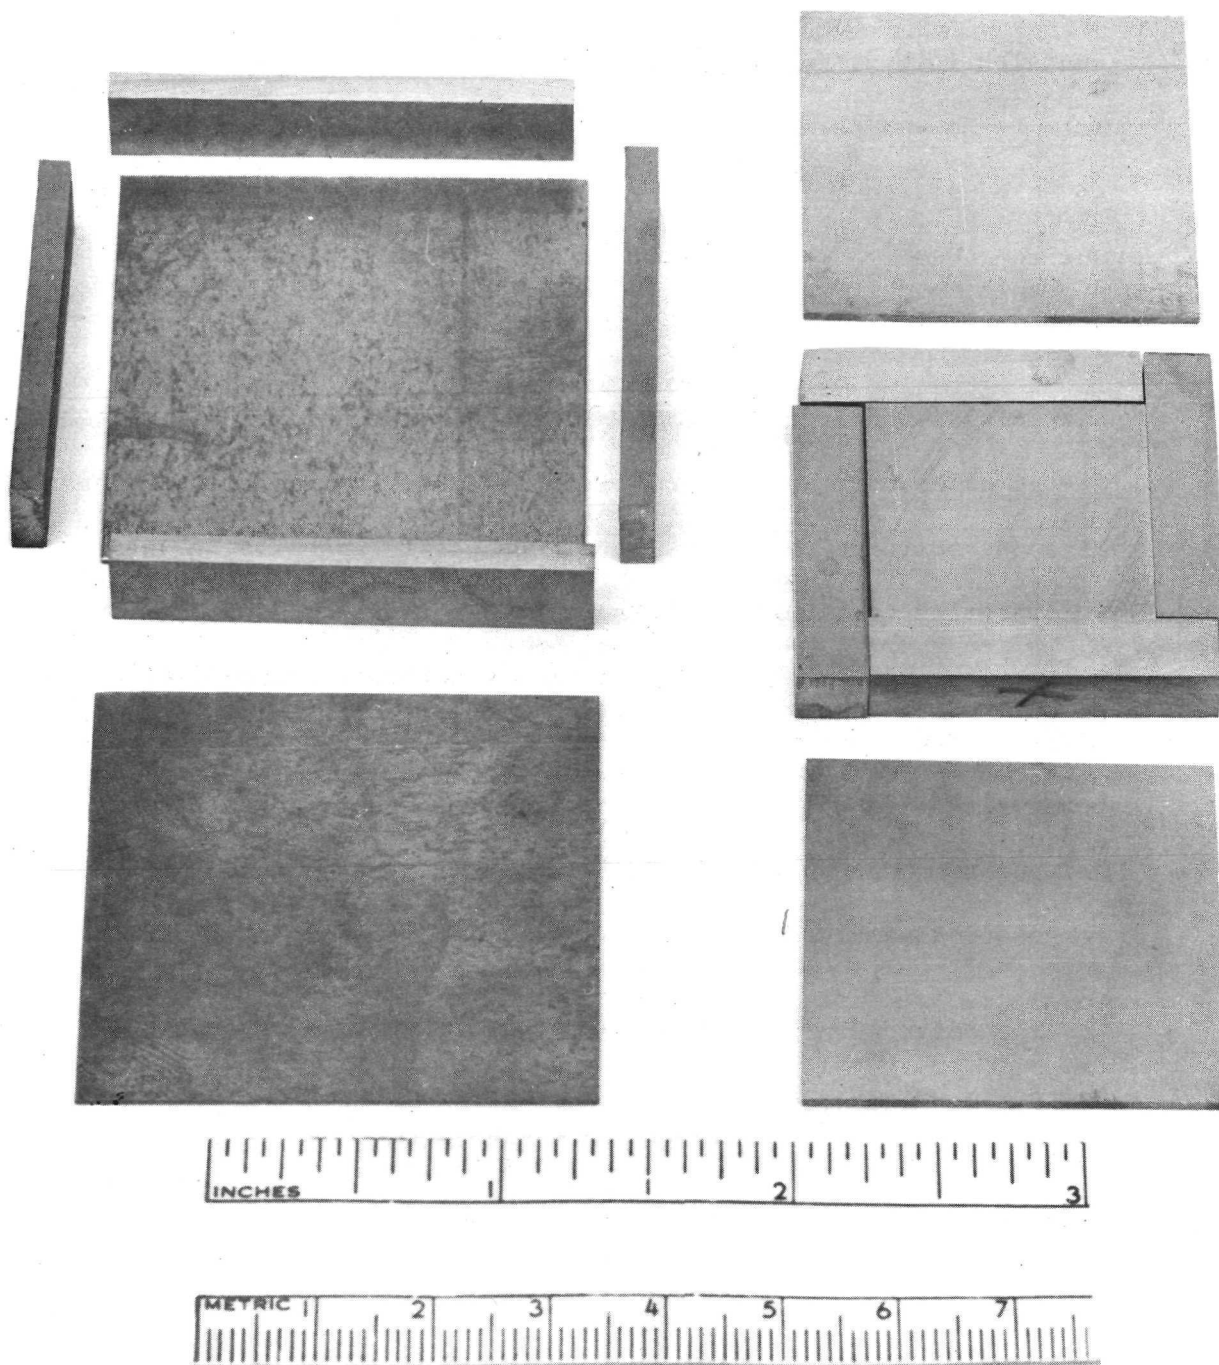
Chromium composite assembly (right) with high strength chromium alloy core plate, frame pieces and cladding sheets of MP-24. For hot gas pressure bonding the composite will be sealed in the molybdenum container (left). (Neg. P71-1-3)
